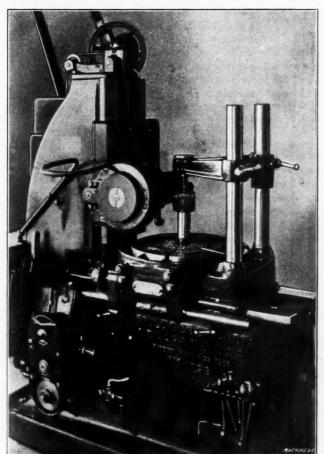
Hobbing the Gears on a Gould & Eberhardt Gear Hobber
